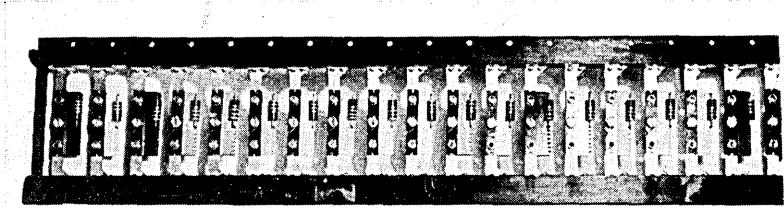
Resistors mounted in their carriers and loaded in magazines ready for the component placement machine
